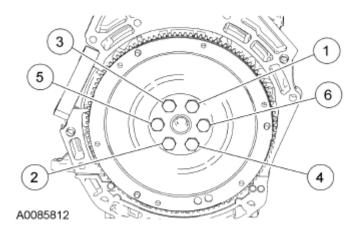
Tightening Sequence Of Dual Mass Flywheel Retaining Bolts Courtesy of FORD MOTOR CO.
